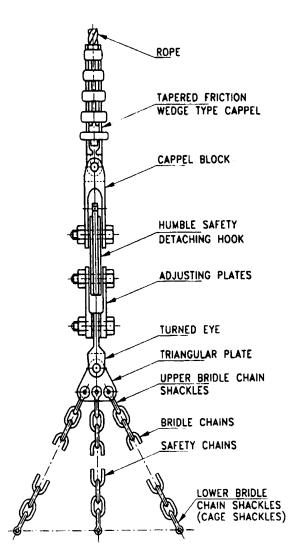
Typical Arrangement of Cage Suspension with Blocks and Links
